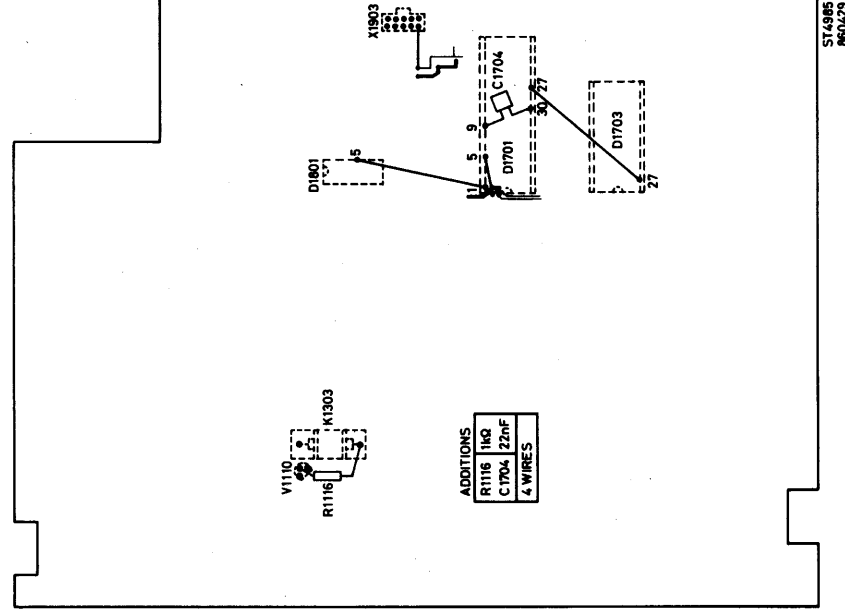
Additional components conductor side main pcb (PM2535 version)
